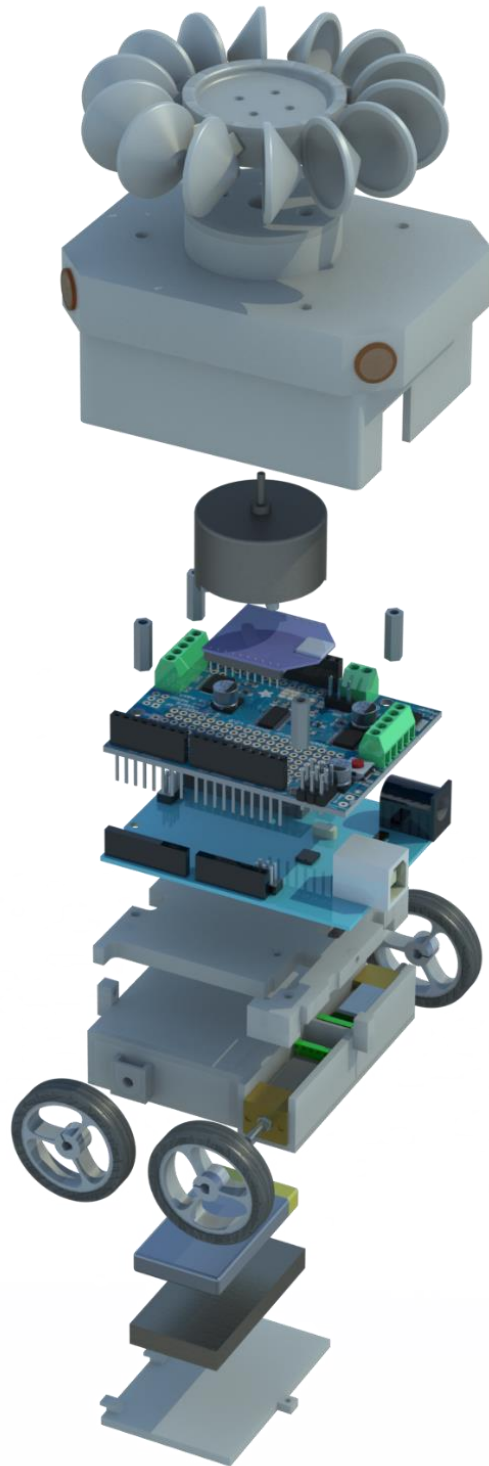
DFRobotShop Rover mobile robot shield.
